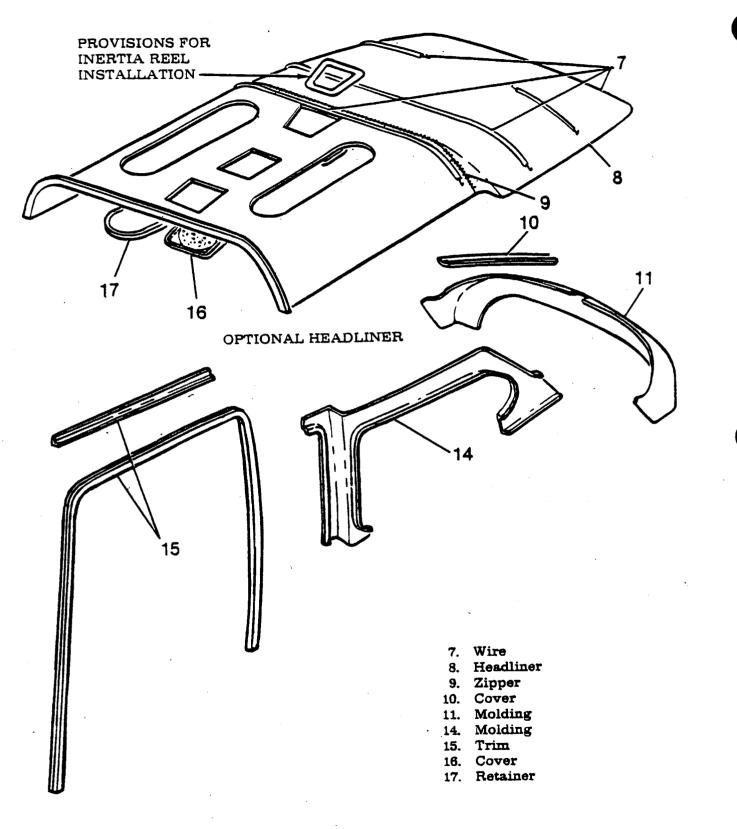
Cabin Headliner and Trim Installation (Sheet 2 of 2)
